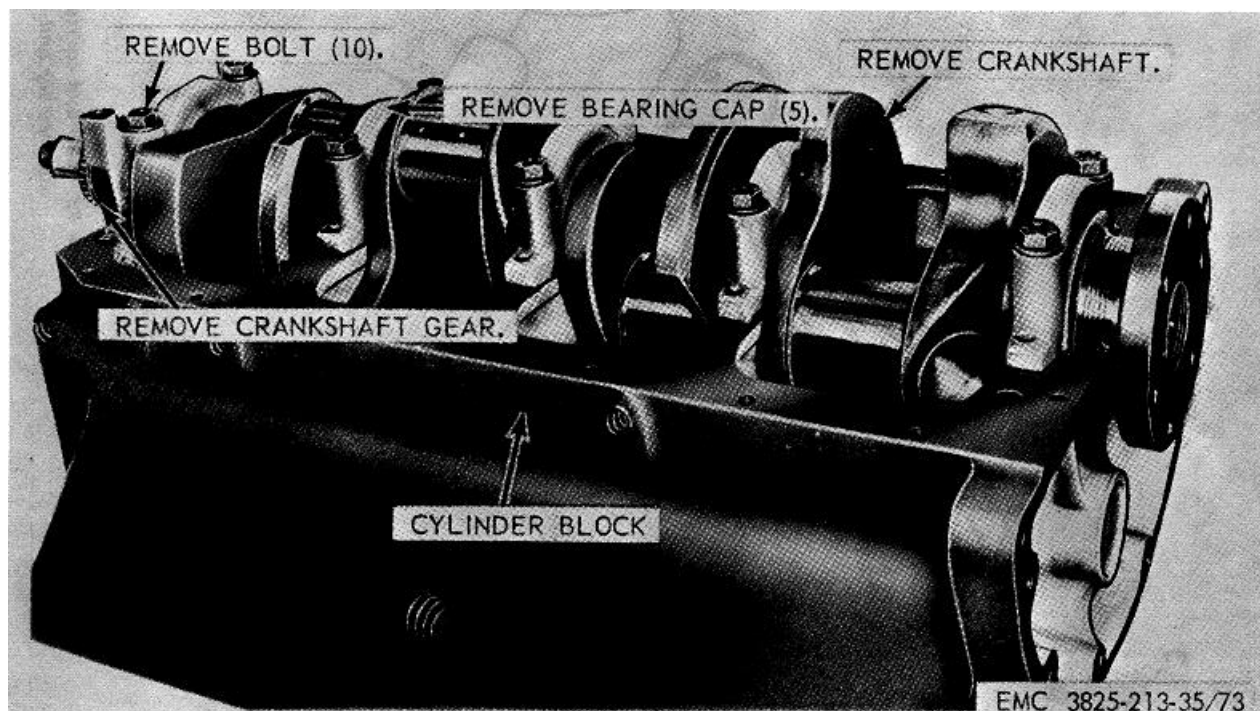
Plow and carrier engine crankshaft and main bearings, removal and installation.
